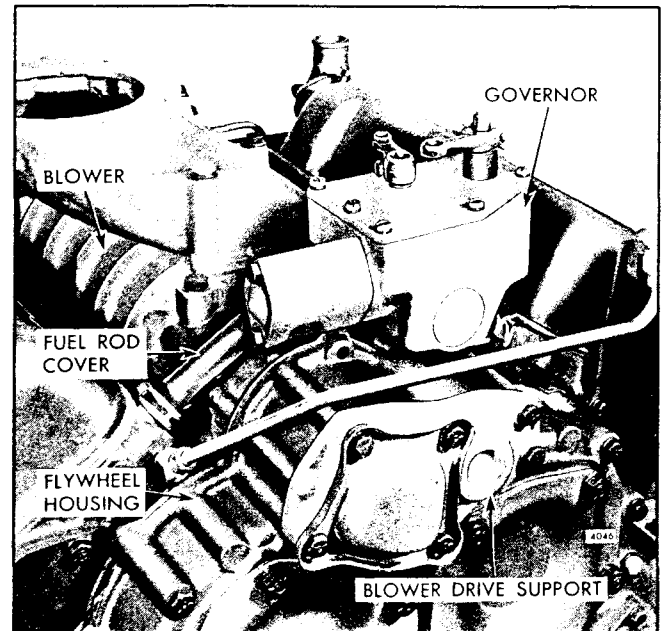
Blower Drive Support Mounting on 6V-53 Engine
